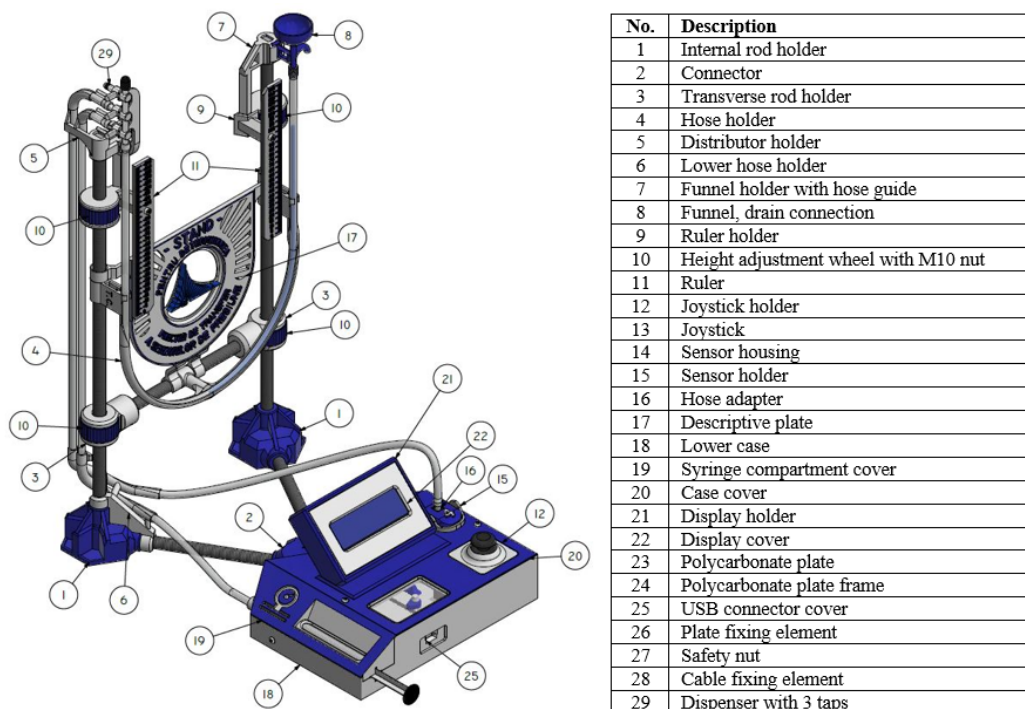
Stand for pressure change applied to atmospheric pressure sensors: 1-Internal rod holder; 2-Connector; 3- Transverse rod holder; 4-Hose holder; 5-Distributor holder; 6-Lower hose holder; 7-Funnel holder with hose guide; 8-Funnel, drain connection; 9-Ruler holder; 10-Height adjustment wheel with M10 nut; 11-Ruler; 12-Joystick holder; 13-Joystick; 14-Sensor housing; 15-Sensor holder; 16-Hose adapter; 17-Descriptive plate; 18-Lower case; 19-Syringe compartment cover; 20-Case cover; 21-Display holder; 22-Display cover; 23-Polycarbonate plate; 24-Polycarbonate plate frame; 25-USB connector cover; 26-Plate fixing element; 27-Safety nut; 28-Cable fixing element; 29-Dispenser with 3 taps.
